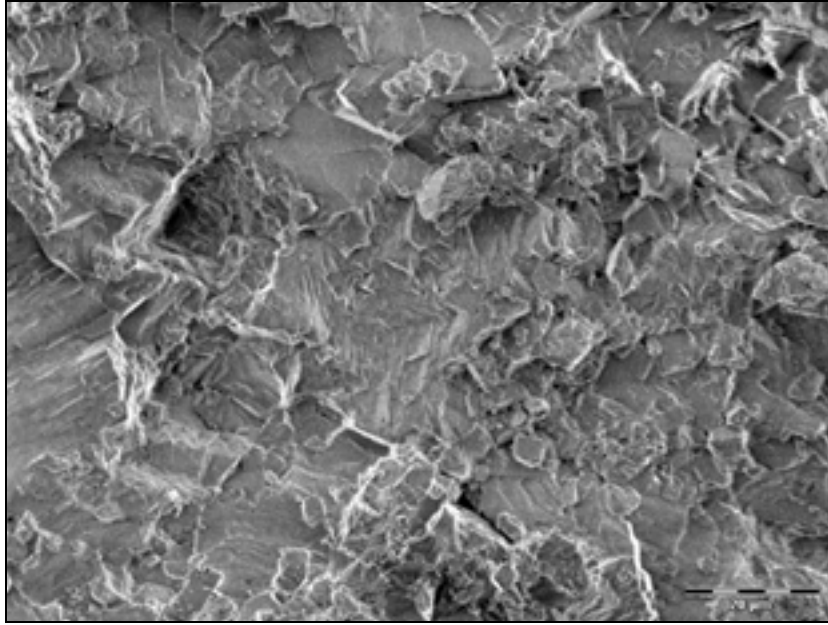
ESEM photo of fracture surface for type II.
